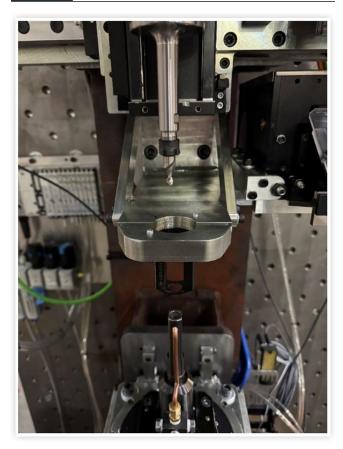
Flexriveter is equipped with a single Mini hopper.
